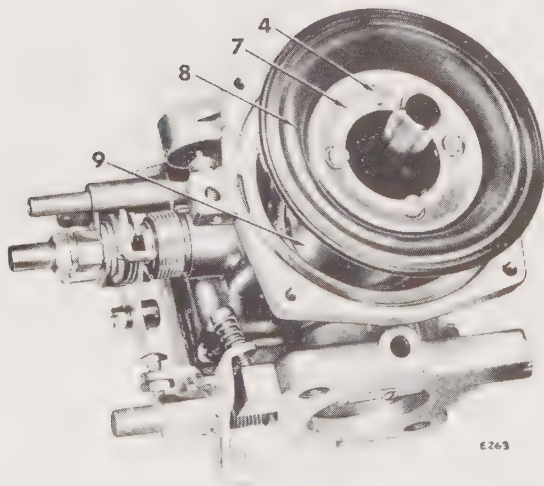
34 Stromberg carburettor with dashpot chamber removed.
